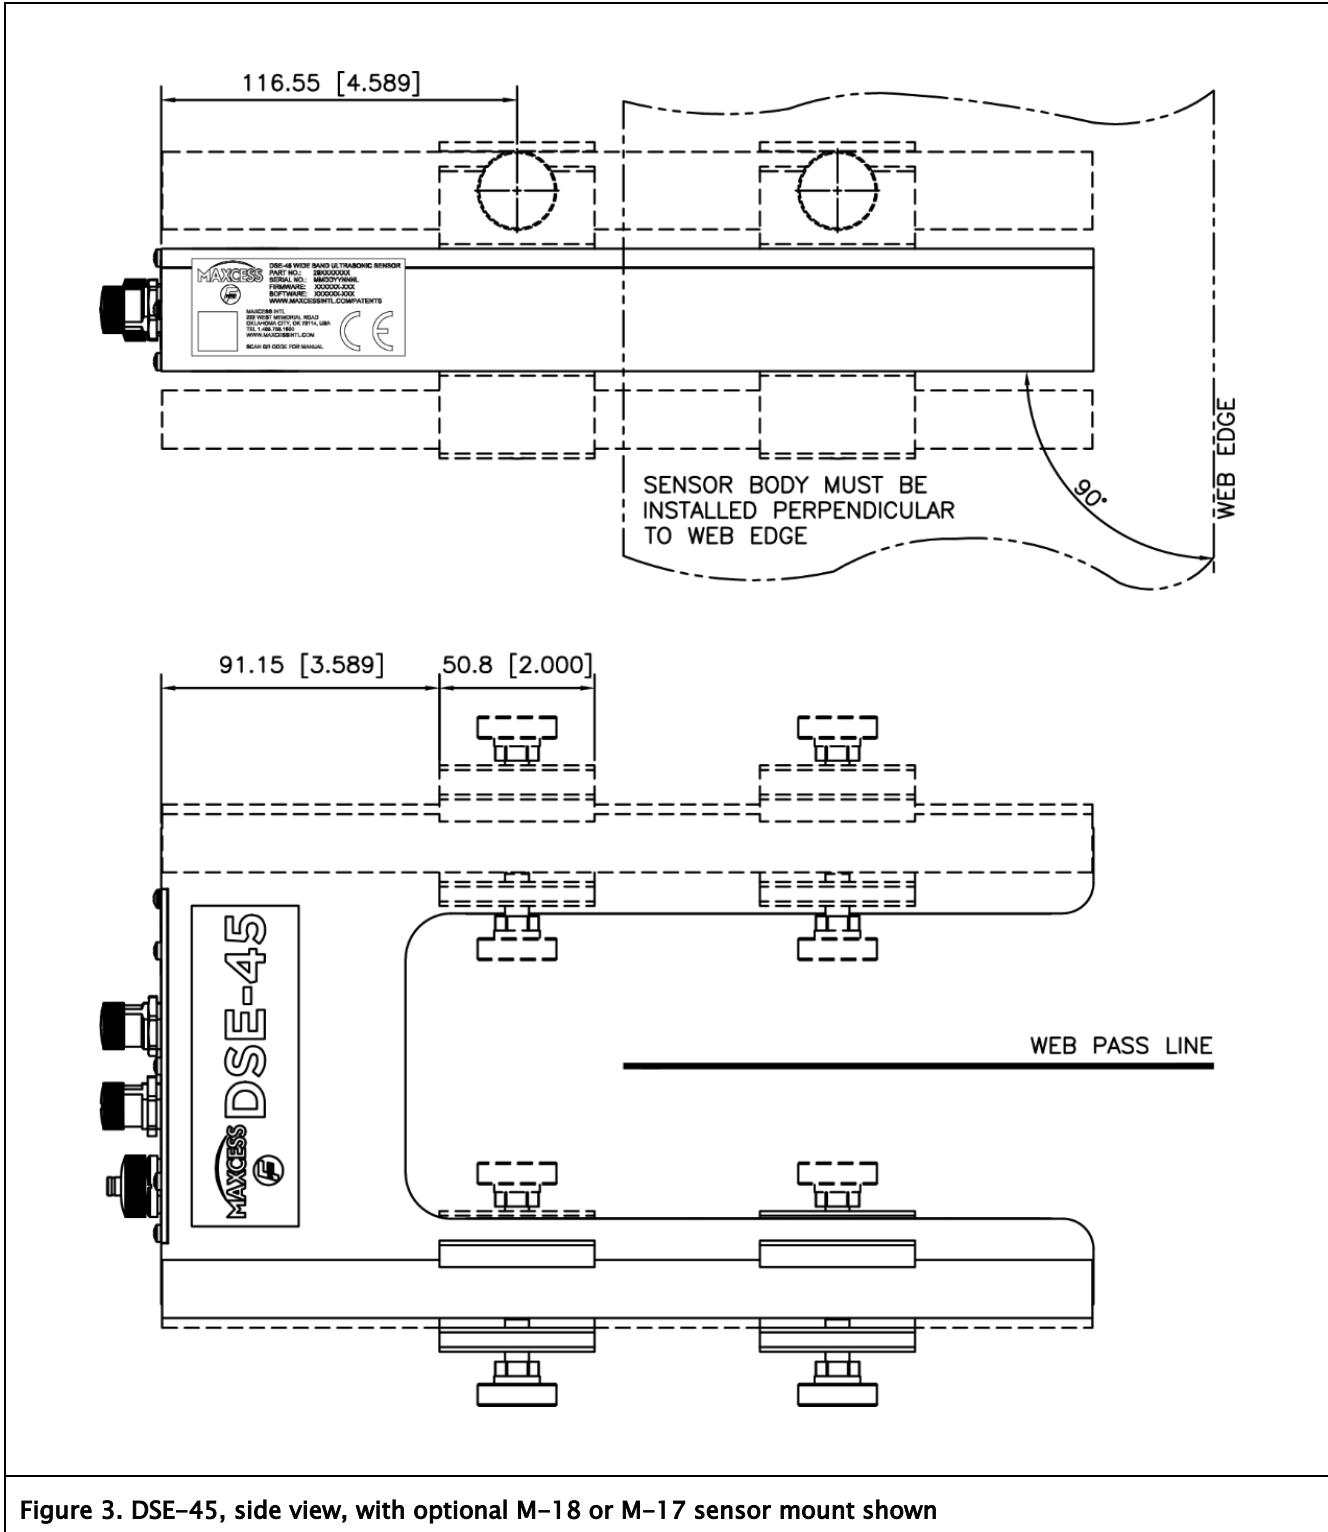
DSE-45, side view, with optional M-18 or M-17 sensor mount shown
